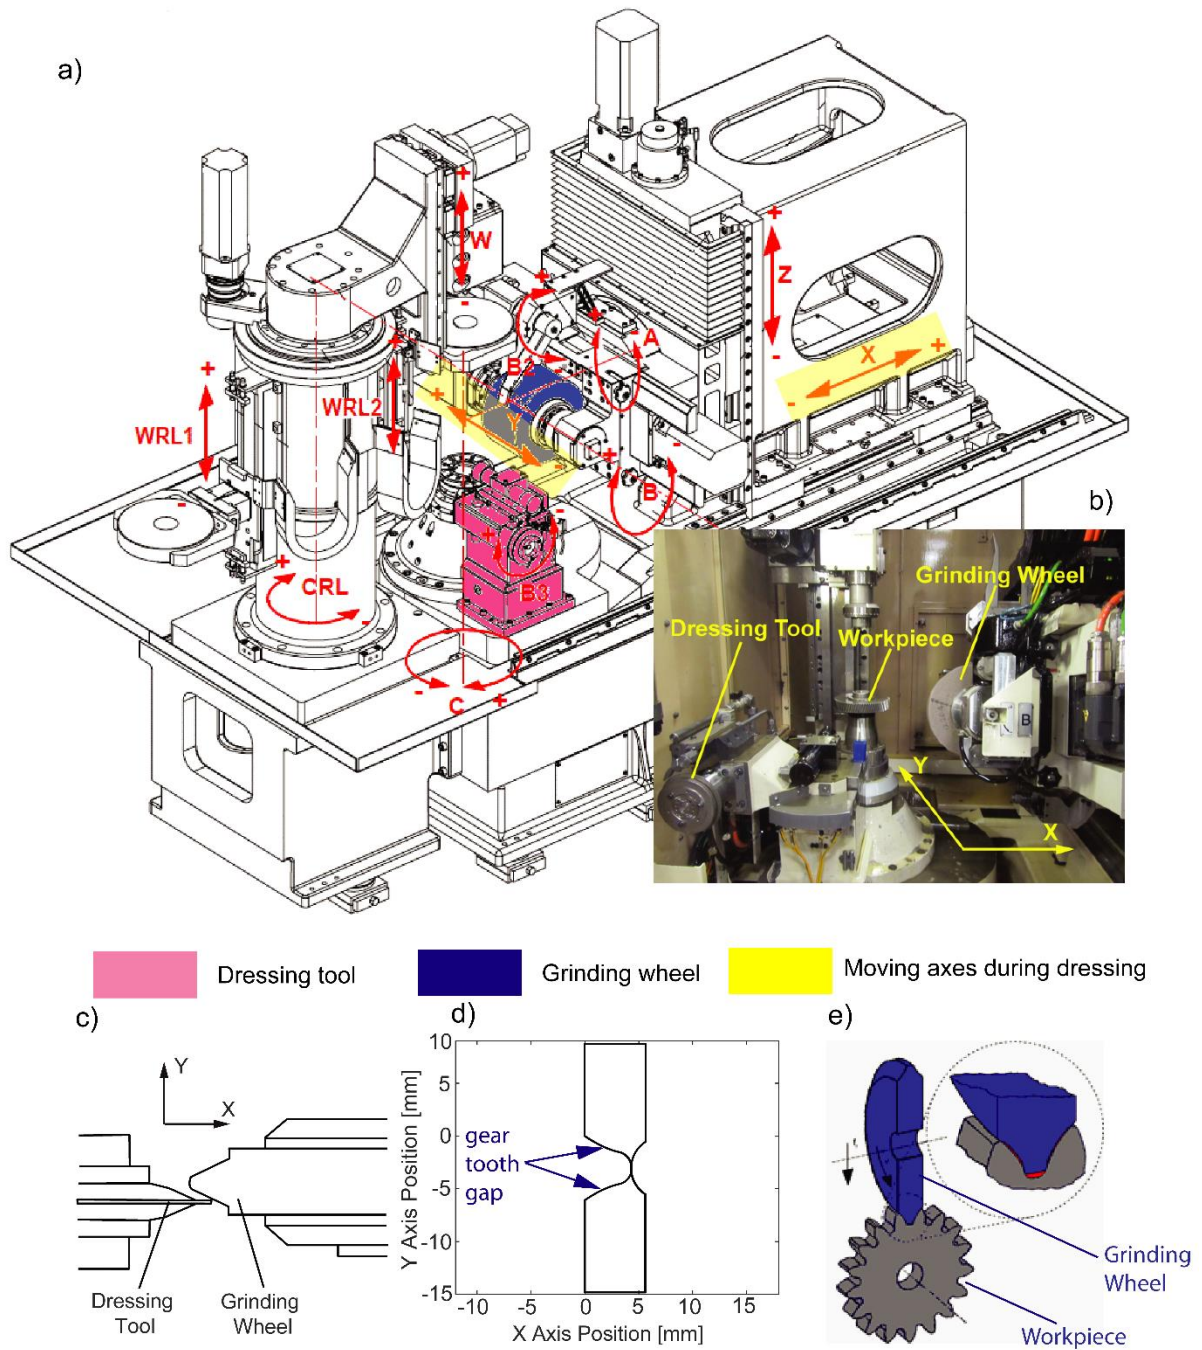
a) Form grinding setup [90] b) Dressing tool, workpiece and grinding wheel. c) Dressing tool-grinding wheel operation [92]. d) Dressing path. e) Workpiece-grinding wheel contact.
